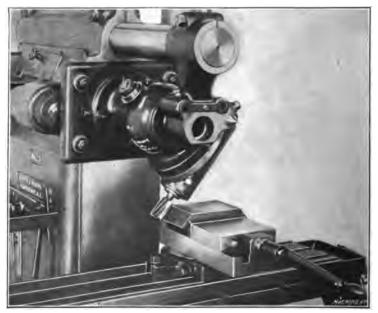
Fig. SS. Vertical Attachment applied to a Horizontal Milling Machine
